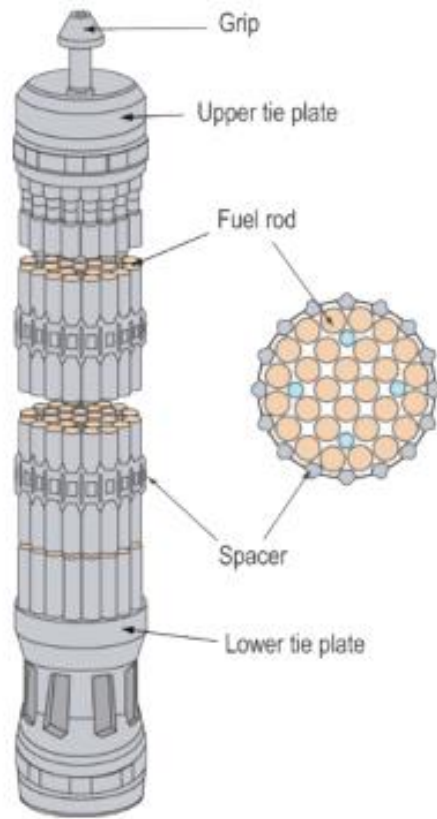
Schematic view of a standard Fugen fuel assembly[60].
